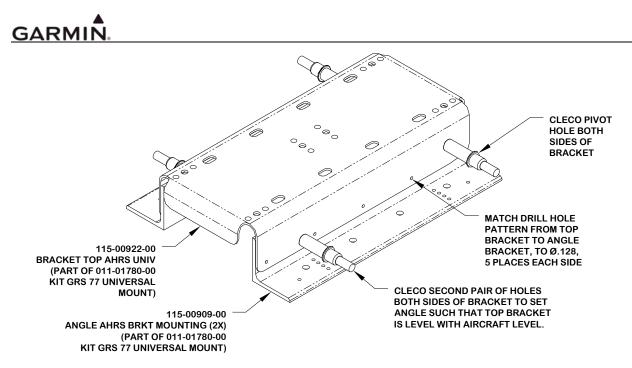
Hole-Pattern Configuration to Set Incline in Assembly for Aircraft Level
